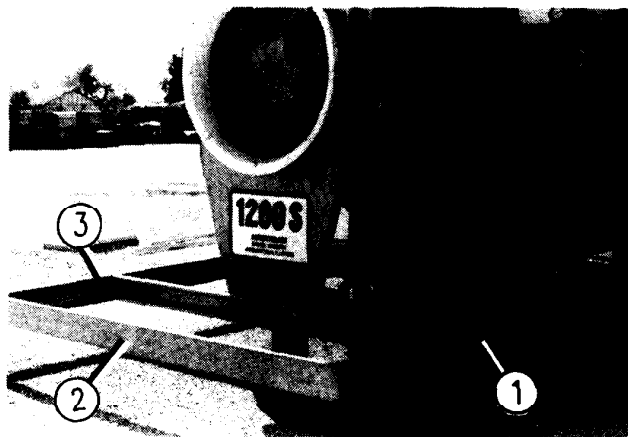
CONNECTING SIDE AND FRONT CHANNELS
